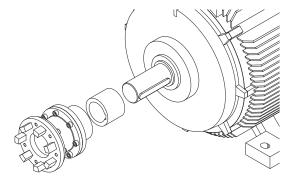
Motor-side coupling half (unit consisting of half of coupling, spacer and cam ring) and spacer sleeve
